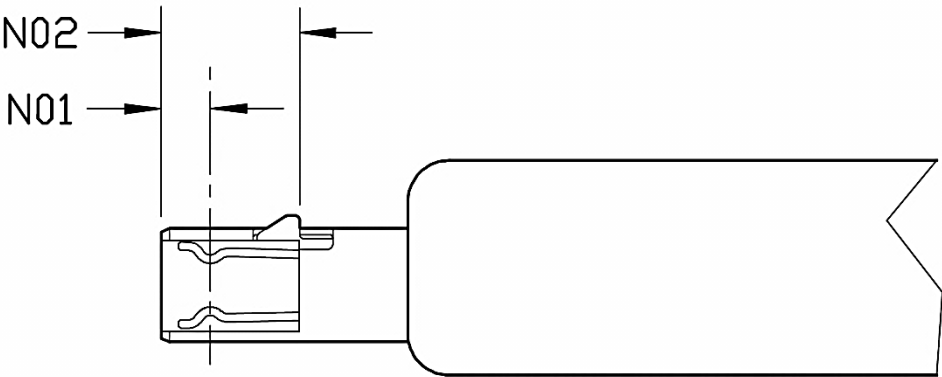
Passive Latching Dimensions for x4 Free Cable Assemblies
